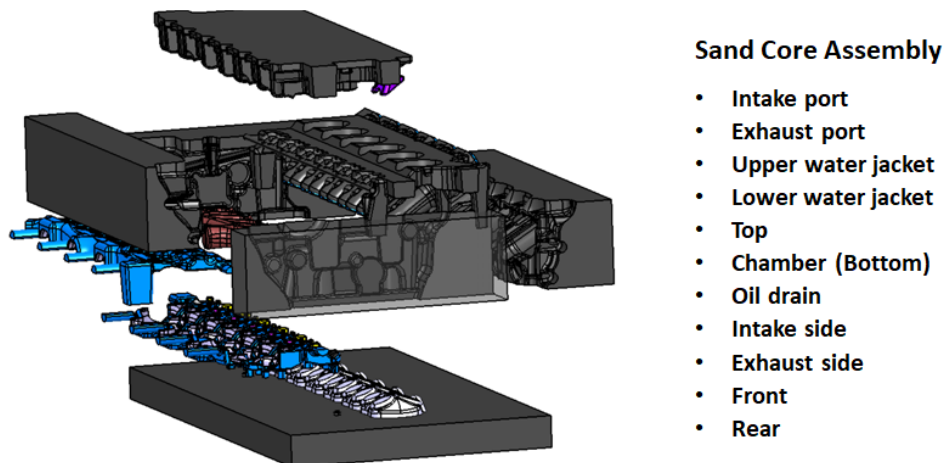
Cylinder head sand core assembly showing the 11 sand cores. Source: Ford.
